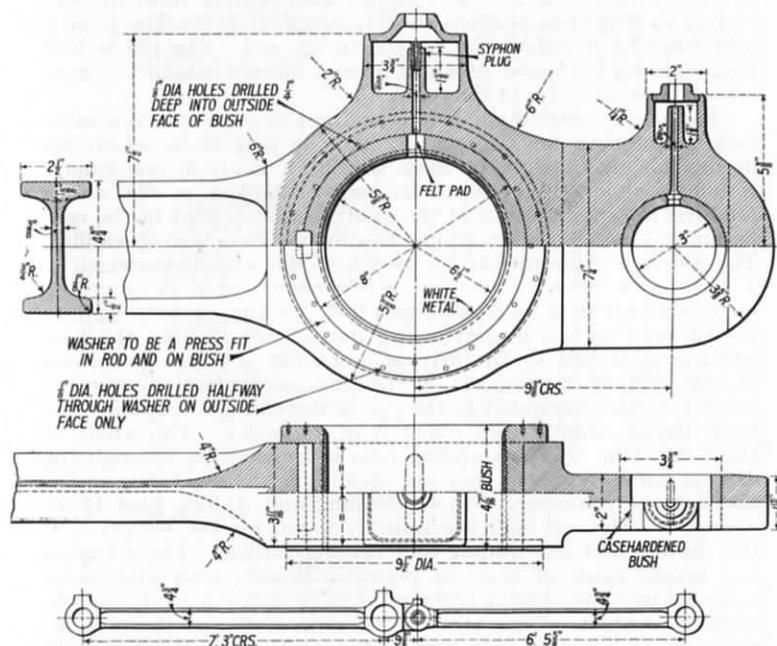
DETAILS OF COUPLING RODS OF 4-6-2 TYPE EXPRESS ENGINE, L.M.S.R.
